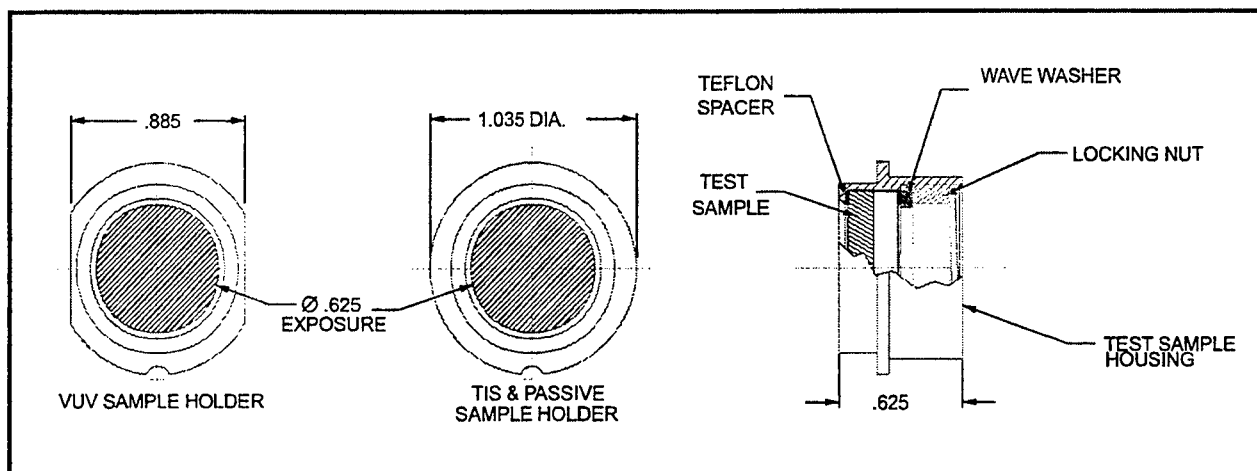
Test Sample Assembly VUV, TIS, and Passive Sample.
